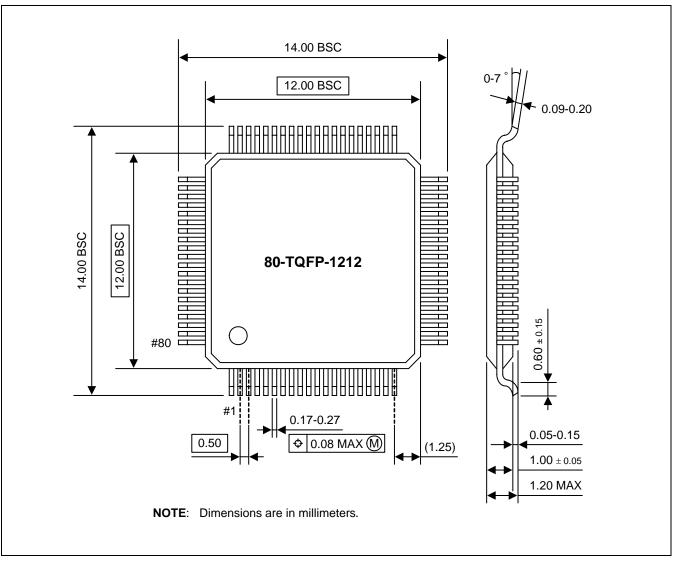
S3C84MB/F84MB 80-TQFP Standard Package Dimension (in Millimeters)
